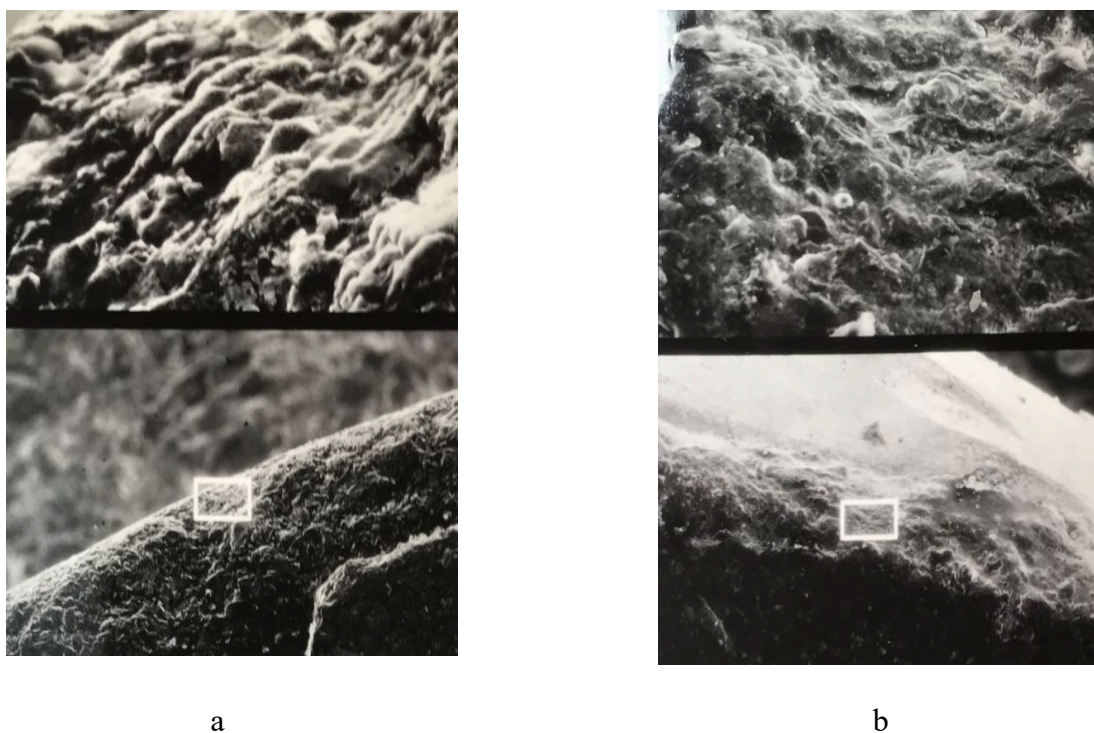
Cutting surfaces of PSHM (a) and syndrill (b), soldered out from working rotary cutters for rotary hole drilling
